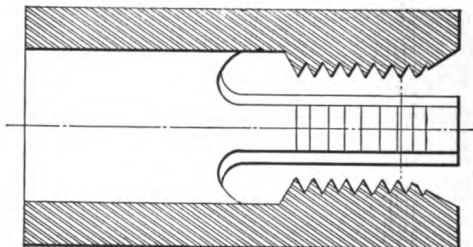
Incorrect Way of Grinding Chamfer on Dies
